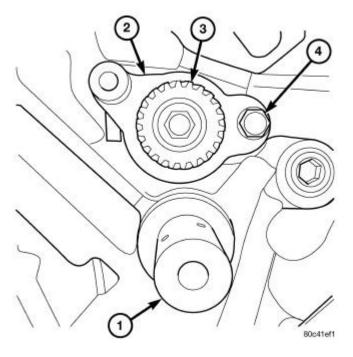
Counterbalance Shaft Retaining Plate Courtesy of CHRYSLER LLC
